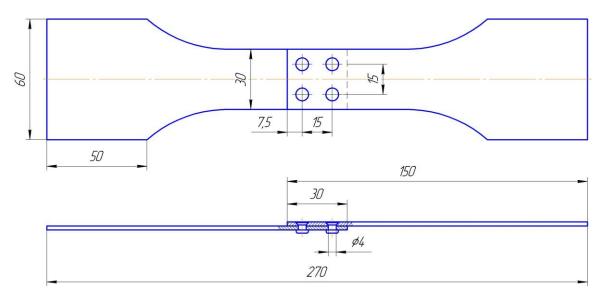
Standard specimen of double riveted lap joint (all dimensions in mm)
